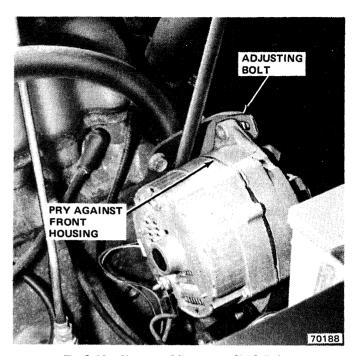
Alternator Adjustment—Six-Cylinder
